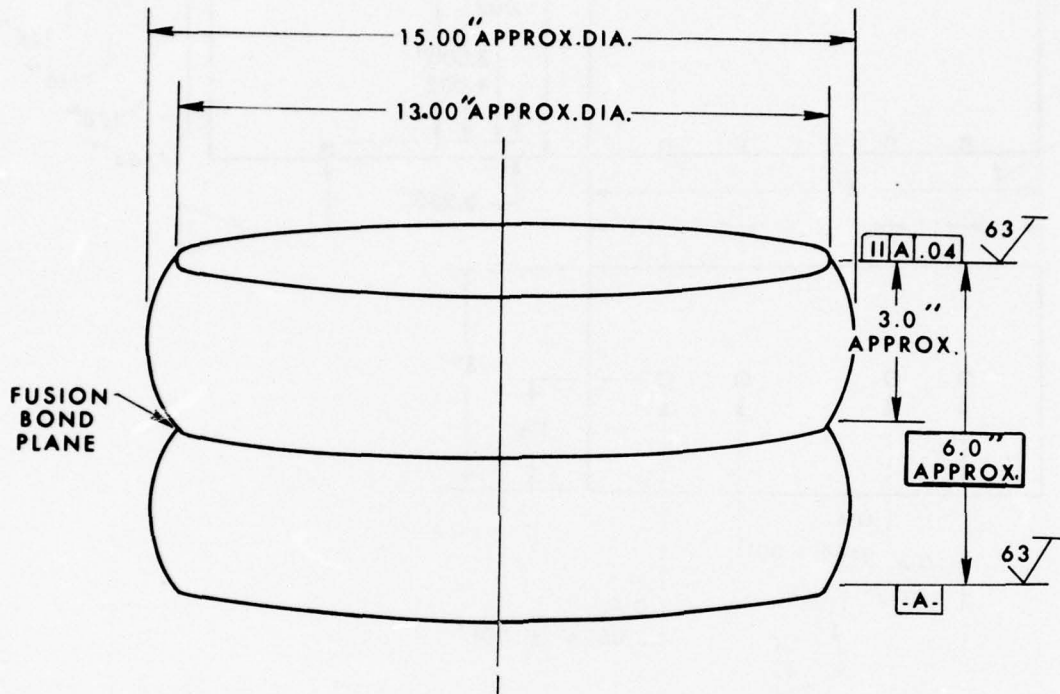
FORGE-DIFFUSION BOND PANCAKE ASSEMBLY,
